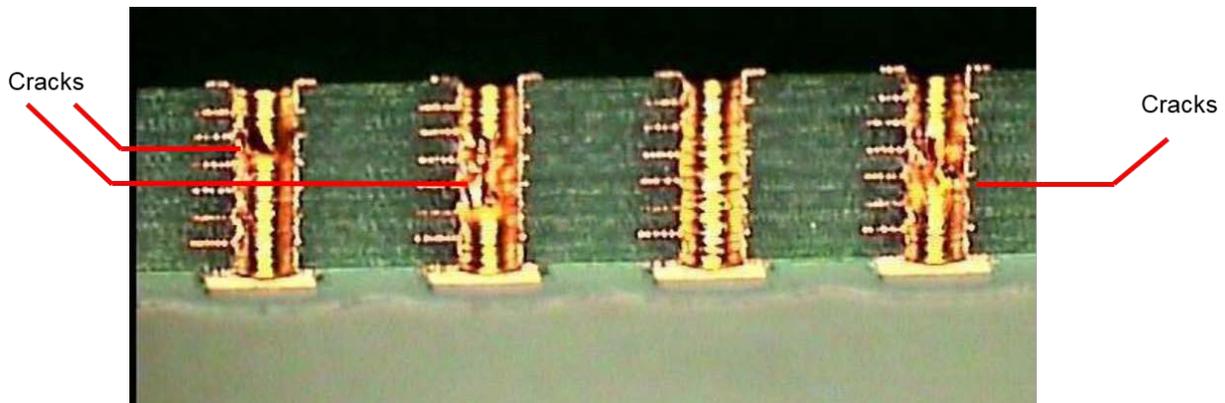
Multilayer via castellation after tests. Cracks were found in some via structures due to multilayer PCB stackup.
